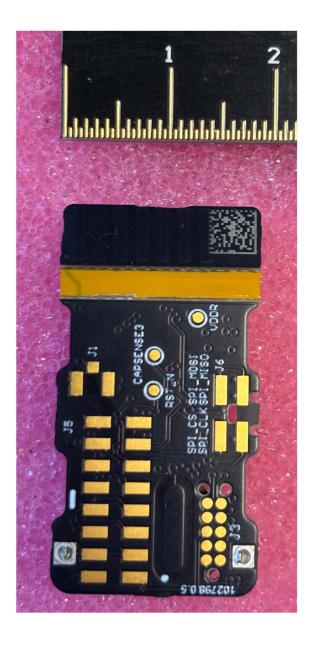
Picture of the back side of the PCB 102895 - Wireless Temperature and Humidity Sensor US. The antenna is at the top of the PCBA.
